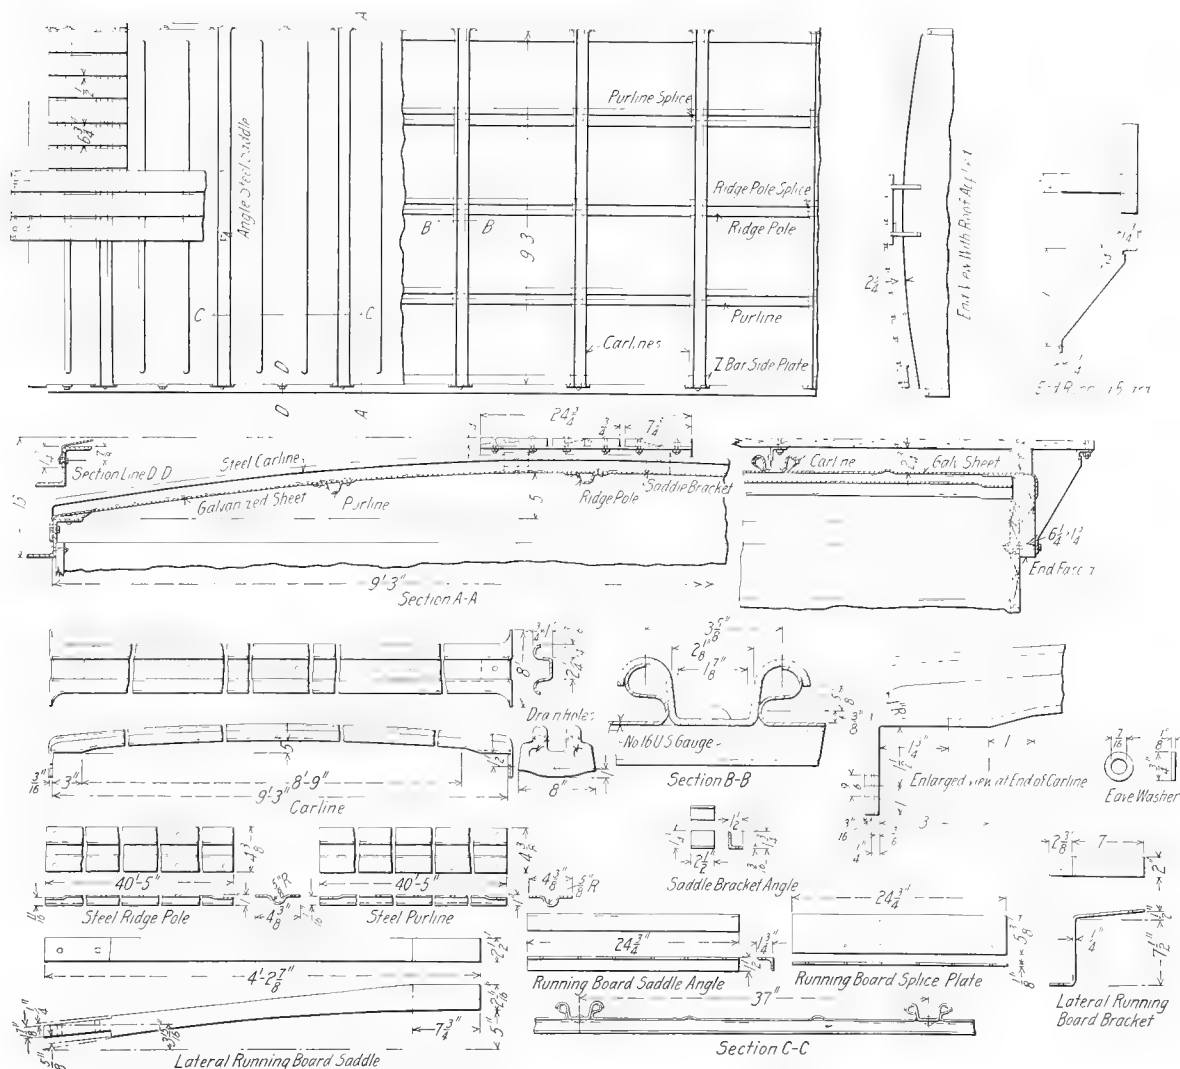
Chicago Common-Sense All-Steel Steel Carline Roof No. 100. Chicago-Cleveland Car Roofing Company.
